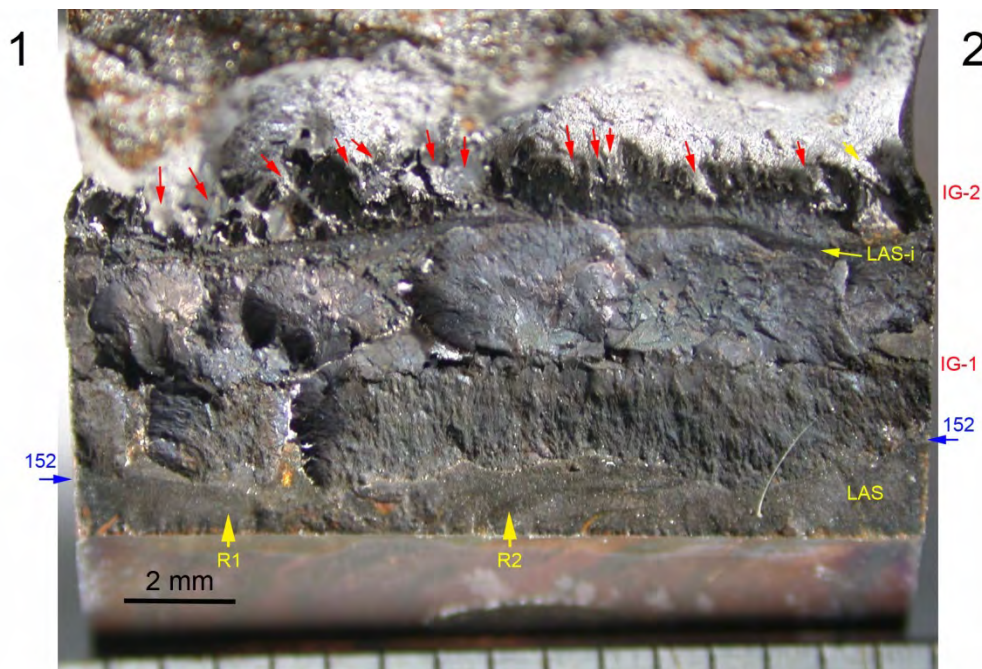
Fracture surface (A, Fig. 8) of specimen N152-LAS-1 tilted to show the final IG region. Crack advance is from bottom to top.
